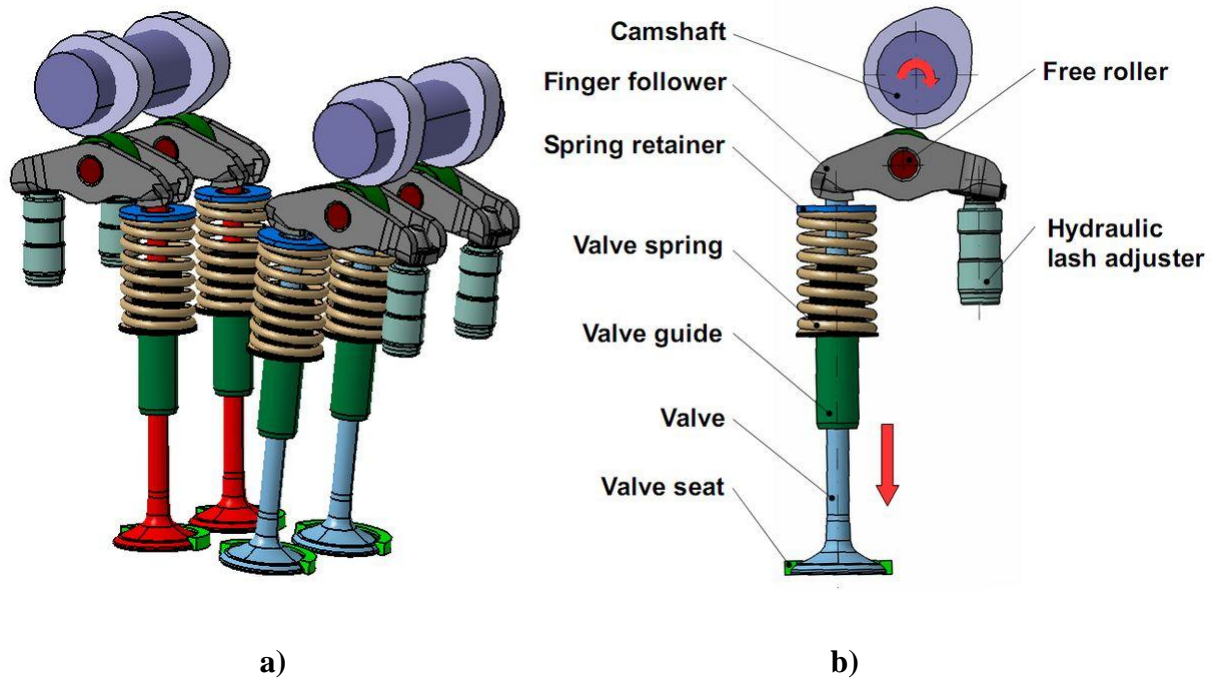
a) Assembly view of the finger follower valve train system; b) The schematic of a single valve cam mechanism.
